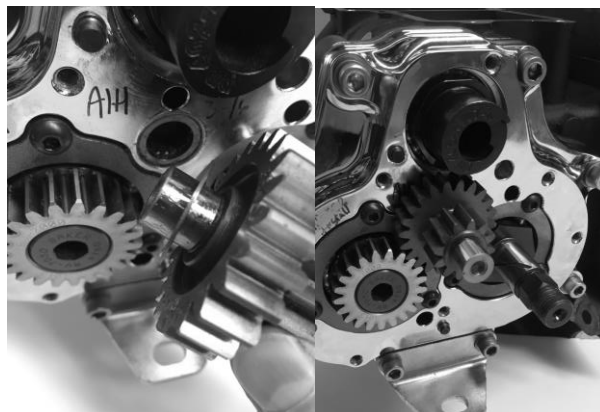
| INSTALLING THE THRUST WASHER AND SPLIT IDLER GEAR
